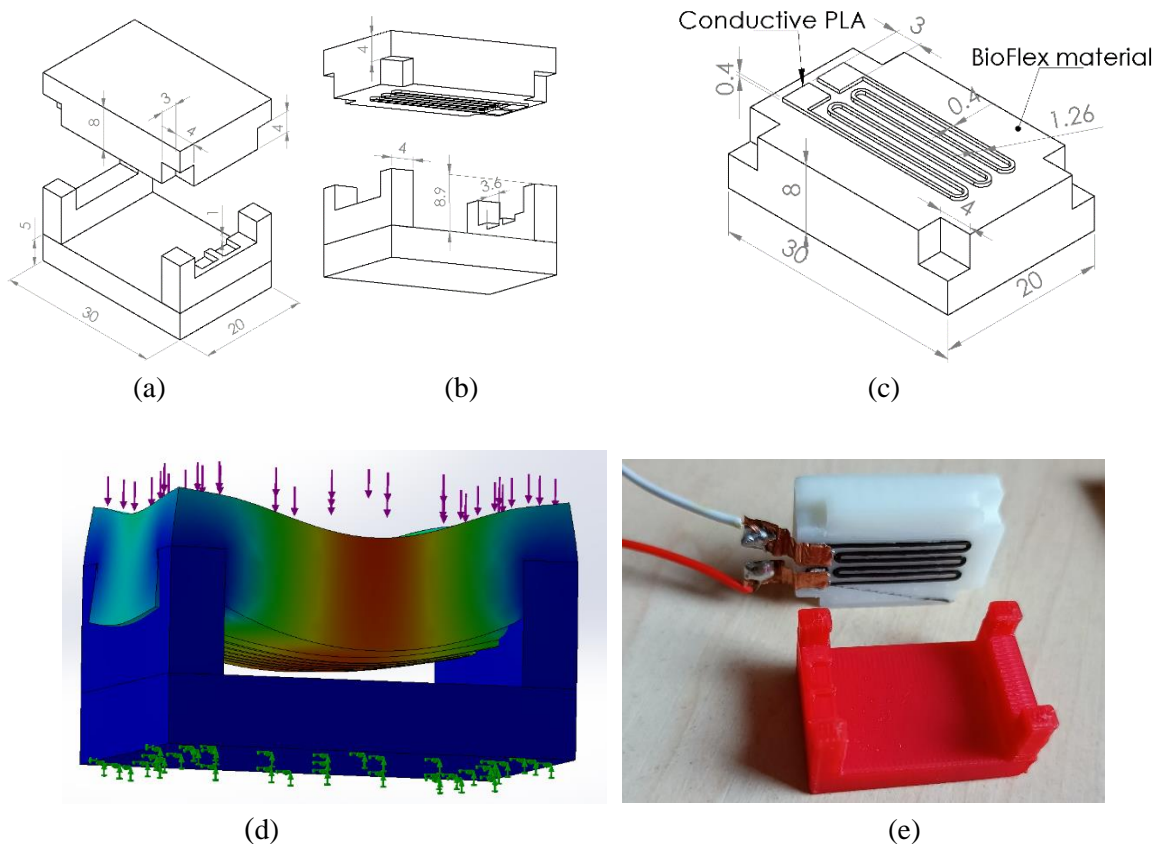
(a) and (b) assembly design of load sensor (c) CAD design of top having strain gauge (d) simulation of load sensor when load applied vertically downward (e) photo of printed load sensor
